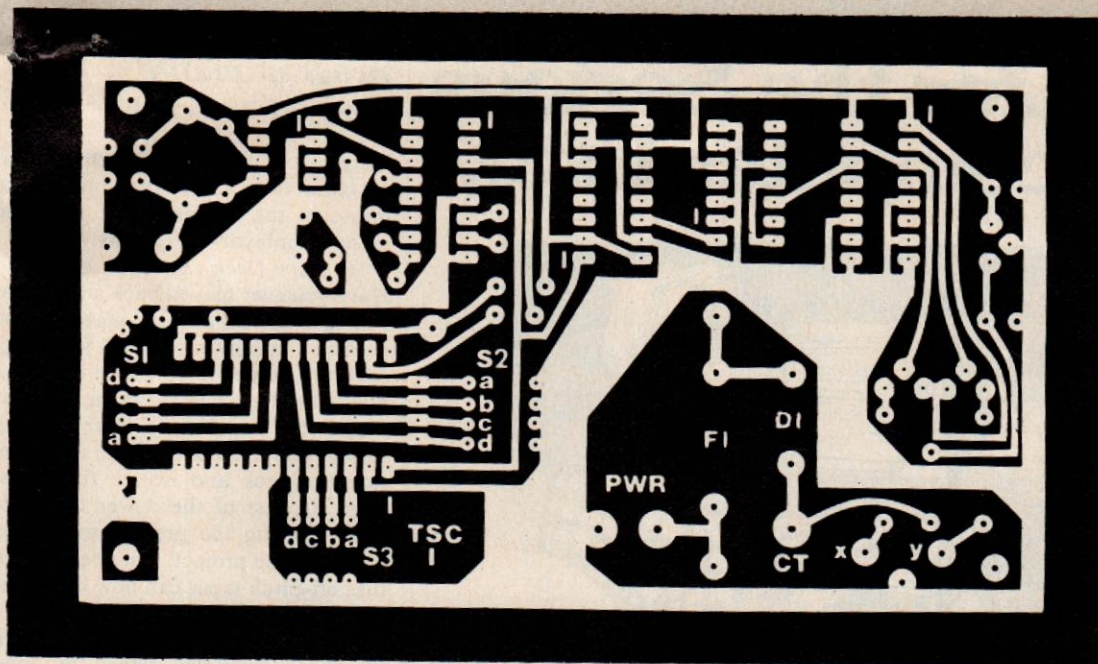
Etching and drilling guide for a printed-circuit board for the project.
